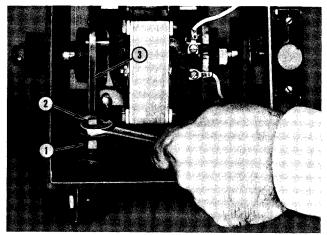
ADJUSTING CAM SHAFT 1. Jam Nut 2. Adjusting Screw 3. Cam
